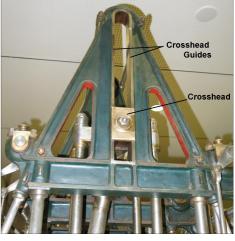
, The four piston rods connecting with the guides crosshead and the connecting rod returning to the Crankshaft, refer Figures 12 and 13.
